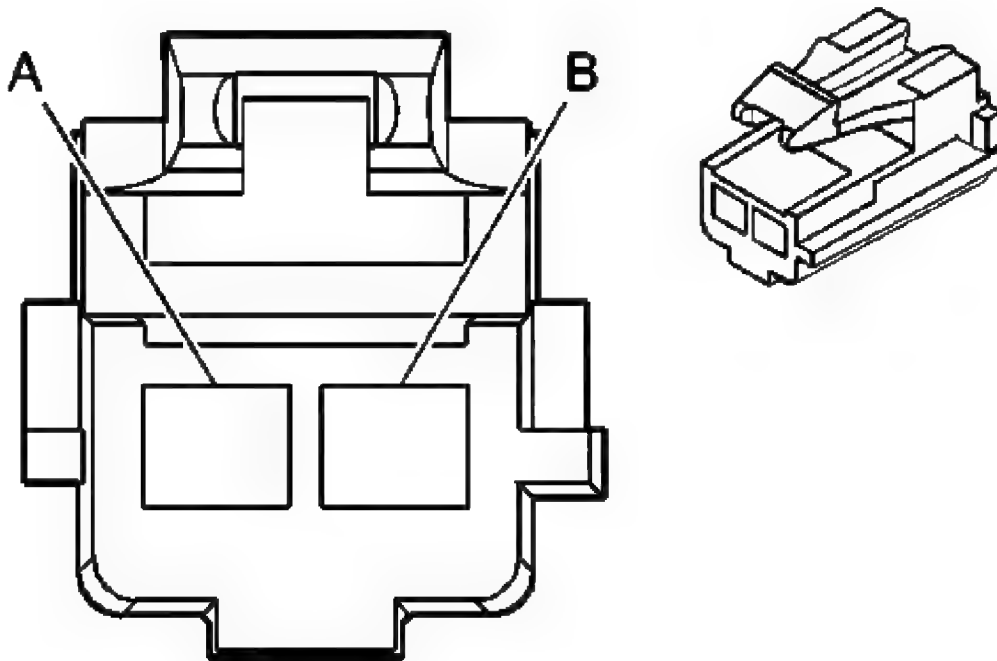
Front Passenger Seat Recline Motor (AH8) Connector End View
